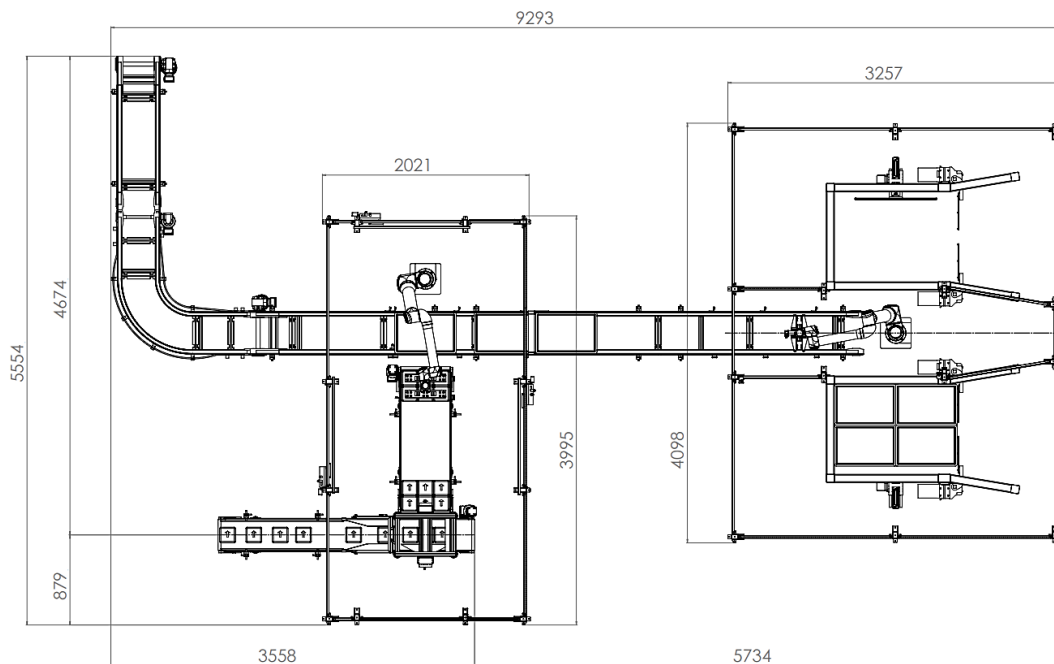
Top view and dimensions (in mm) of the proposed packaging and depalletizing system.
